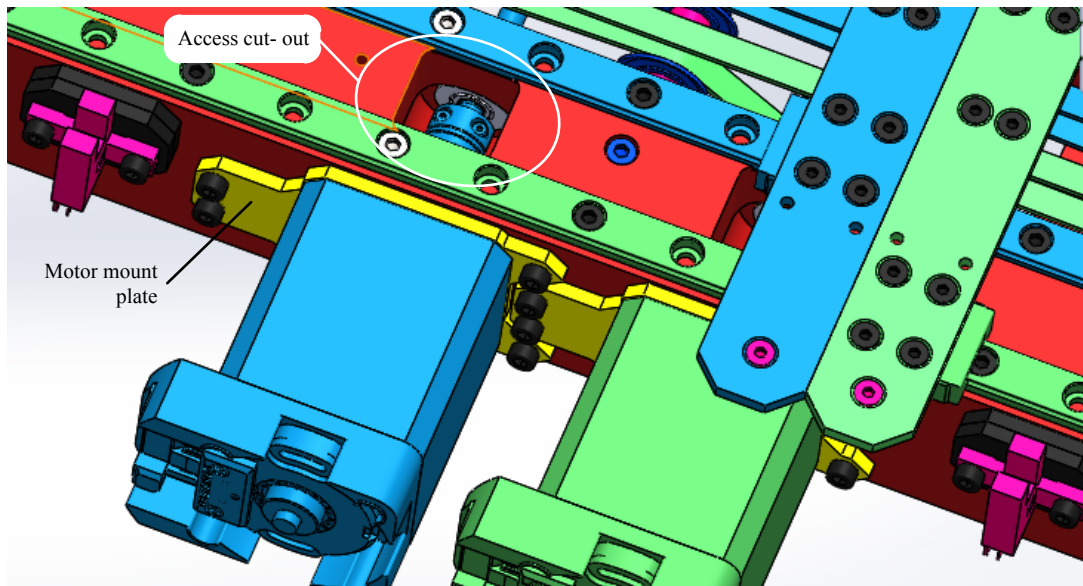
Rail Carriage Motor Mount Plates and Access Cut-out
